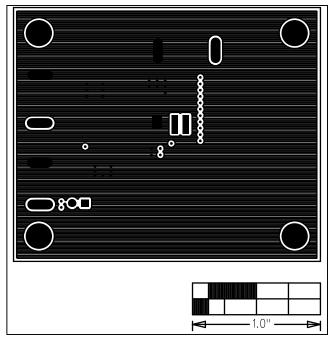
MAXM17516 EV Kit PCB Layout—PGND Layer 3
